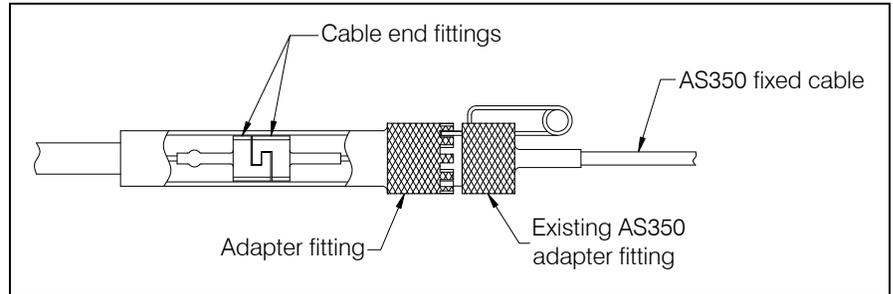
Initial Release Cable Adjustment (P/N 268-024-02 shown)
